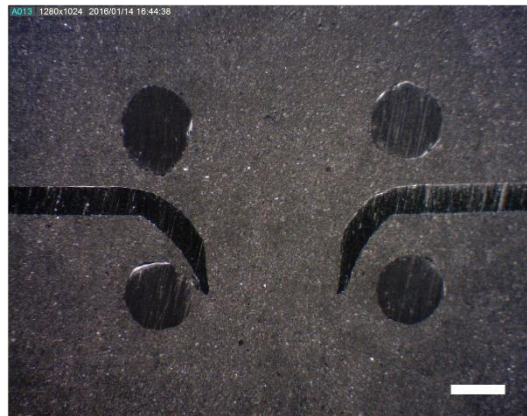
Cross sectional view of a fractured small punch test specimen. Scale bar, 1 mm
